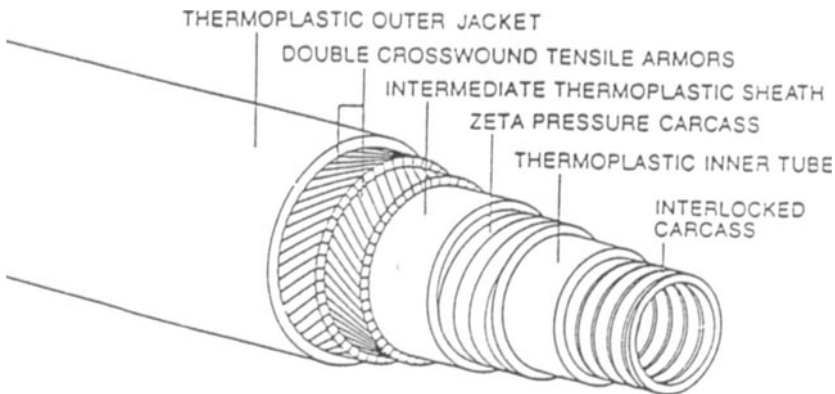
EXAMPLE OF AN UNBONDED PIPE
